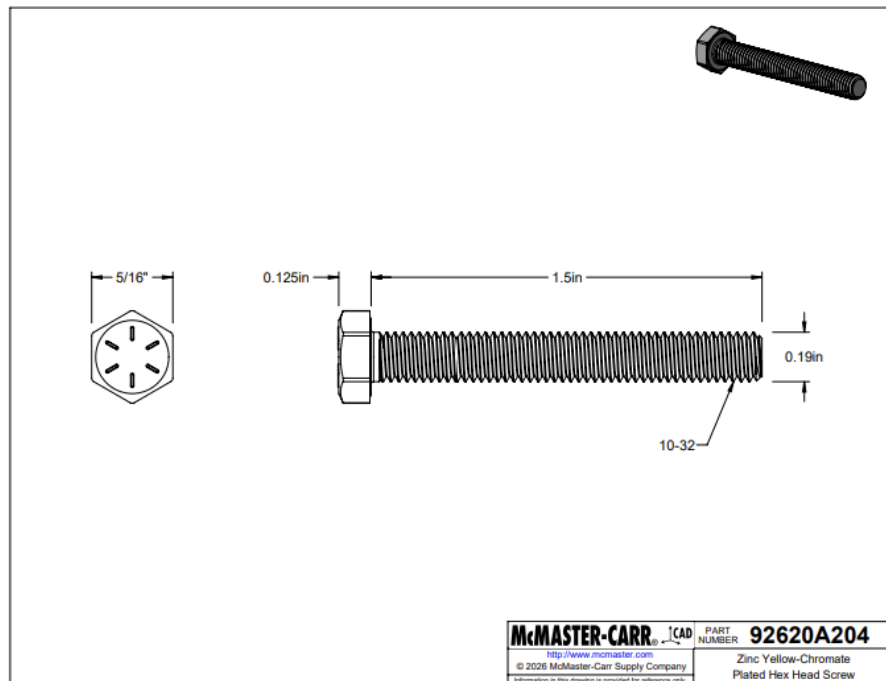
CAD fabrication drawing of bolts. All dimensions in mm.
